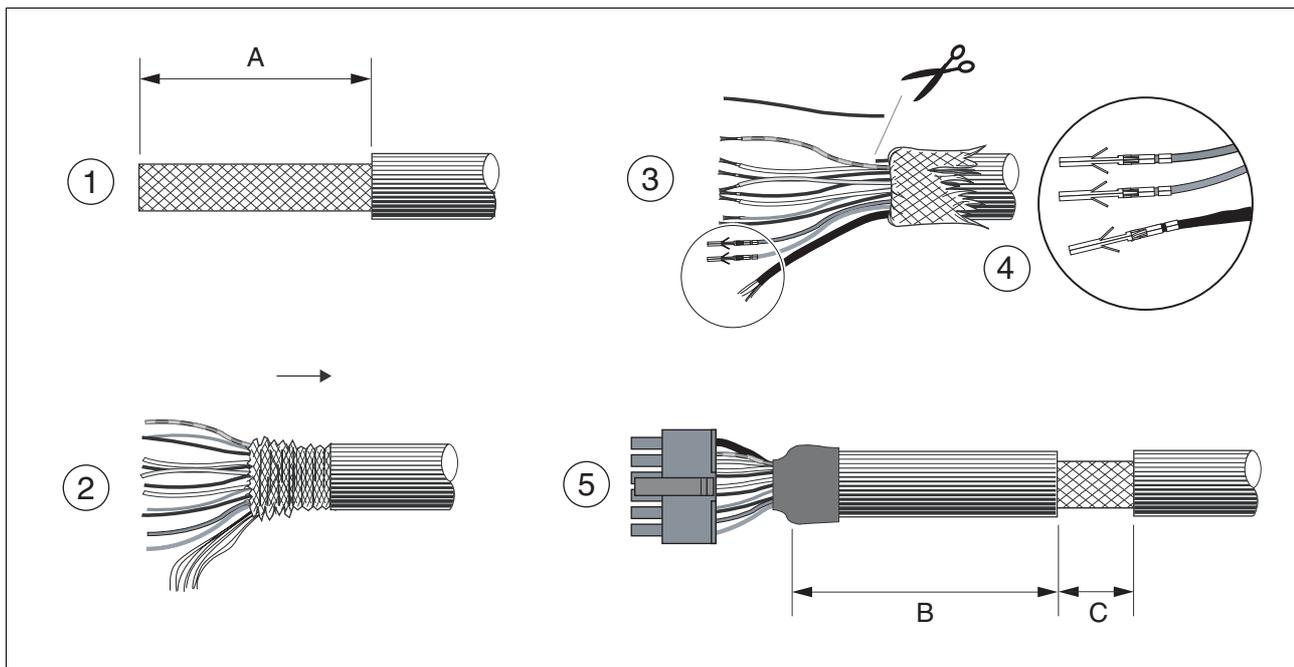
Steps (1-5) for assembly of the encoder cable
